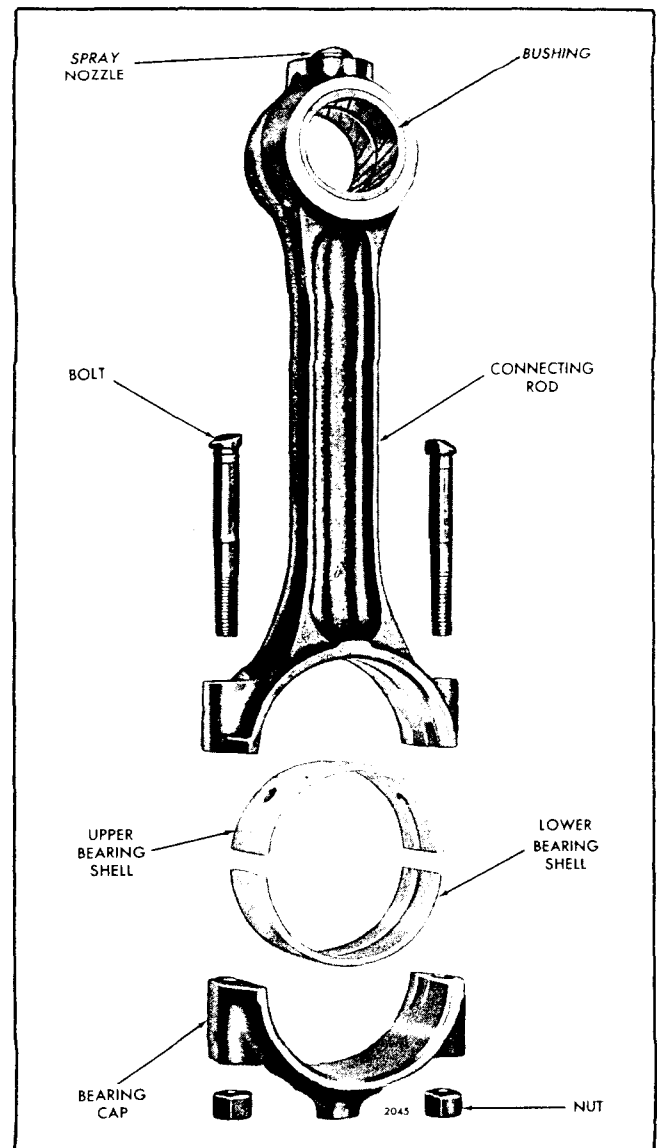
Typical Connecting Rod Details and Relative Location of Parts
